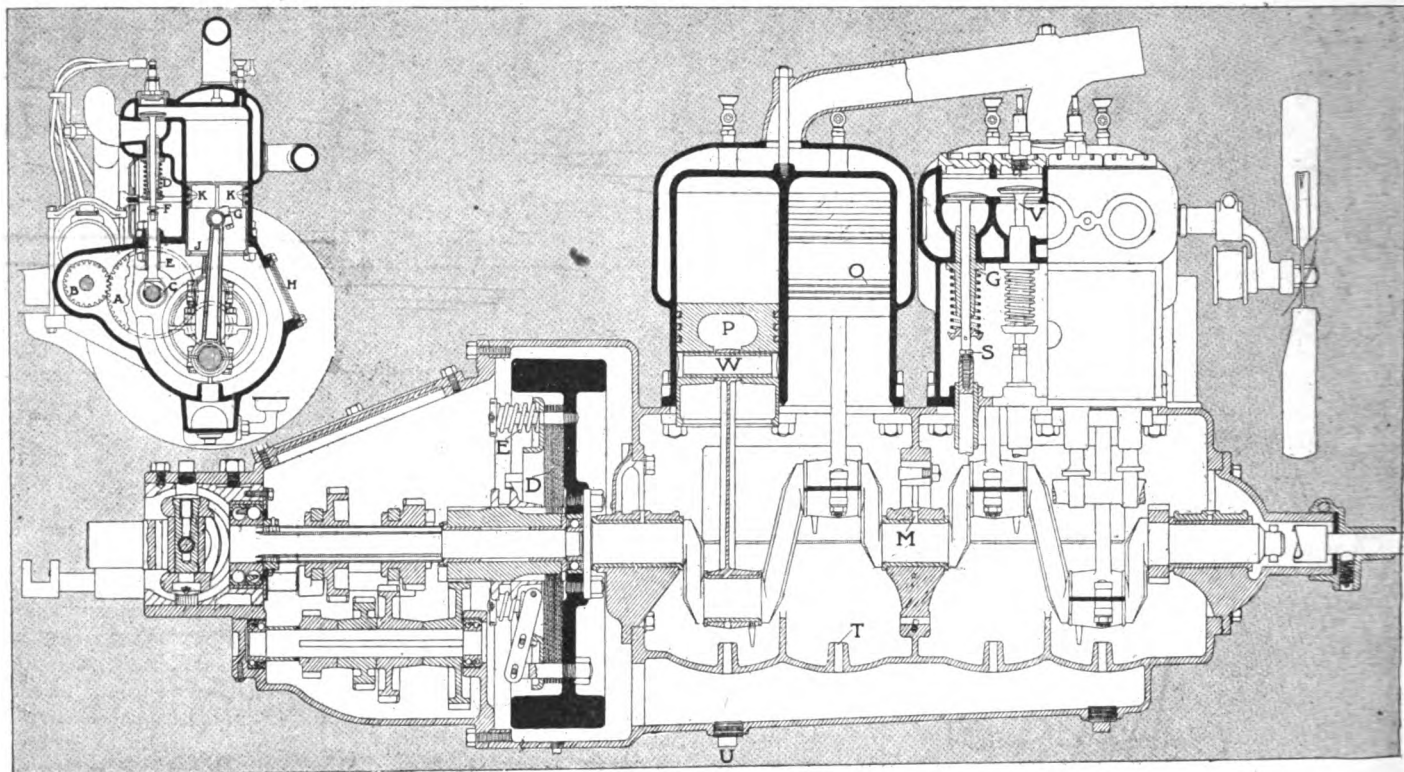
Sectional views of the motor, clutch and gearset showing the distinguishing features of design common to all models
